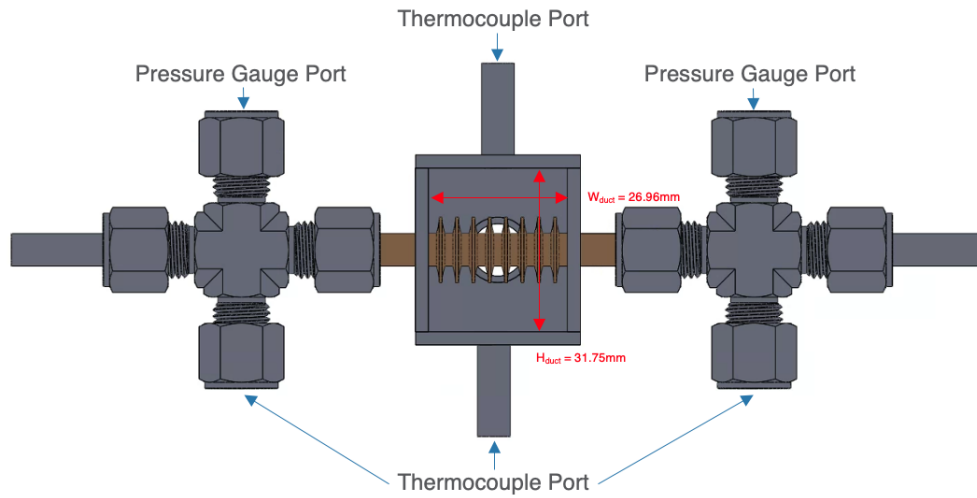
CAD drawing of the duct and tube with Yor-lok fittings
